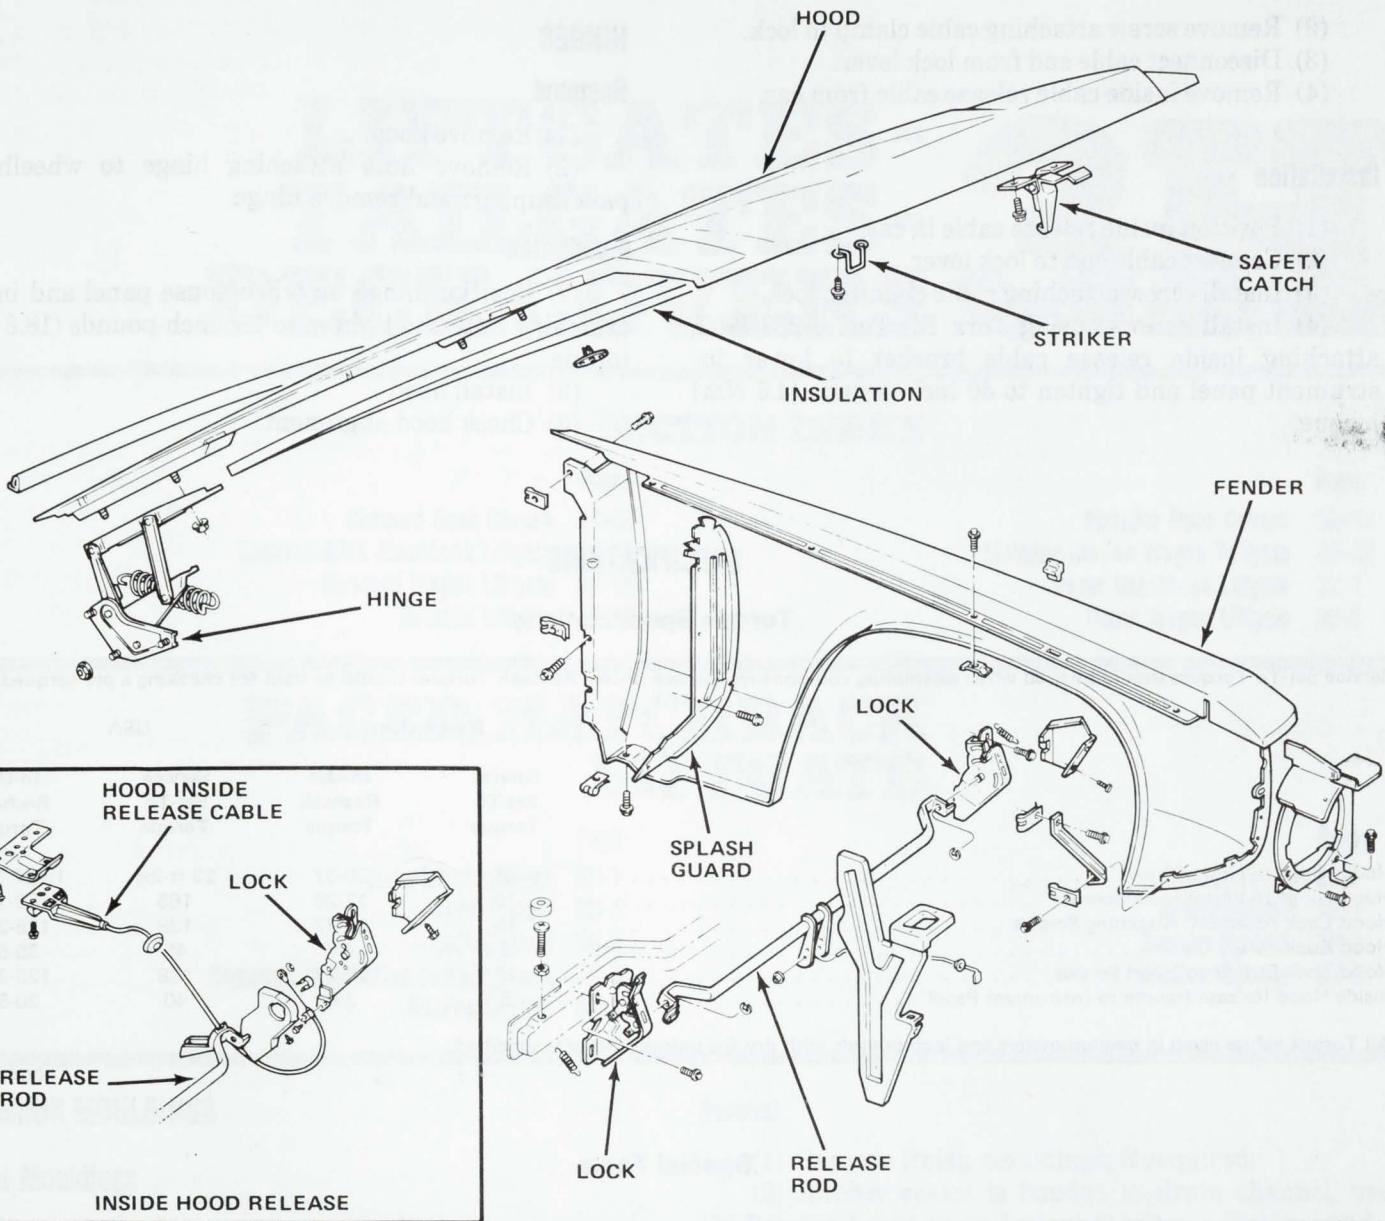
G-7 Front Fender and Hood Components—Matador Sedan
